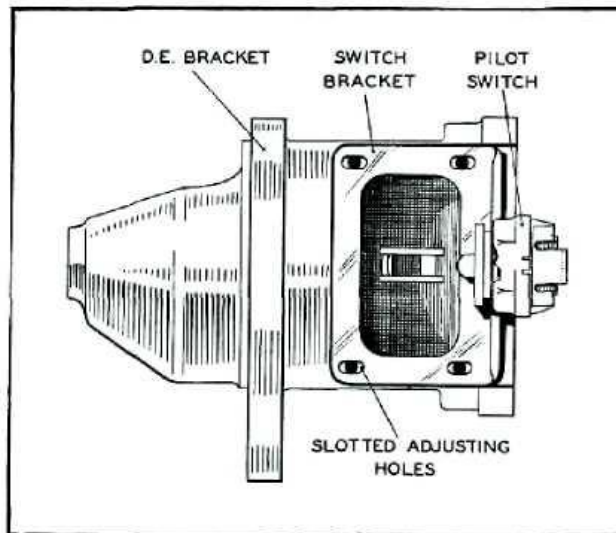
Pilot Switch Bracket with rubber cover removed to show slotted adjusting holes.
